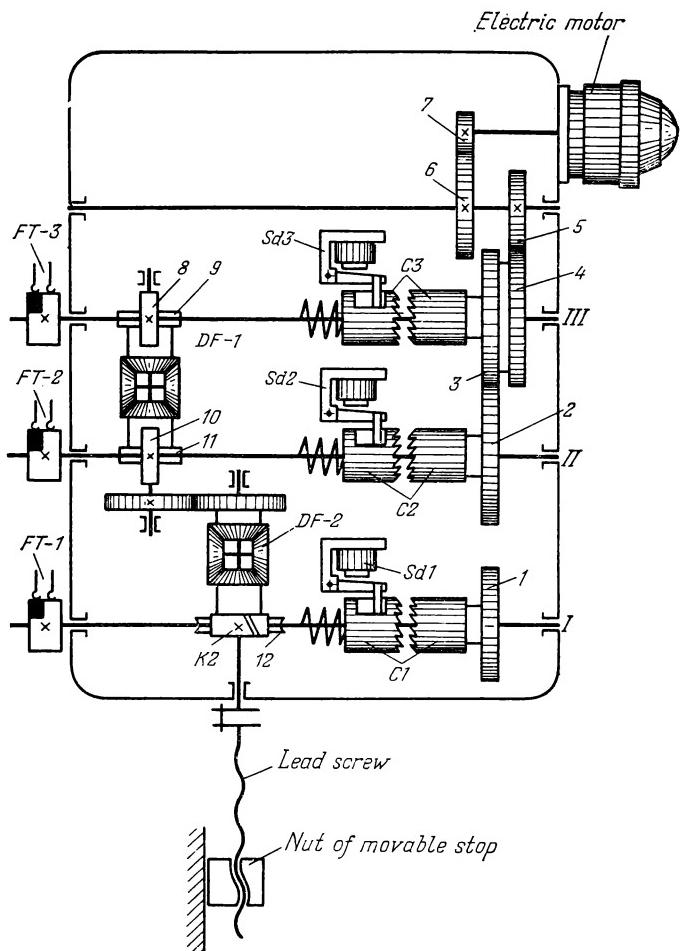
Kinematic diagram of the screw drive mechanism of the model TPI-1M lathe
